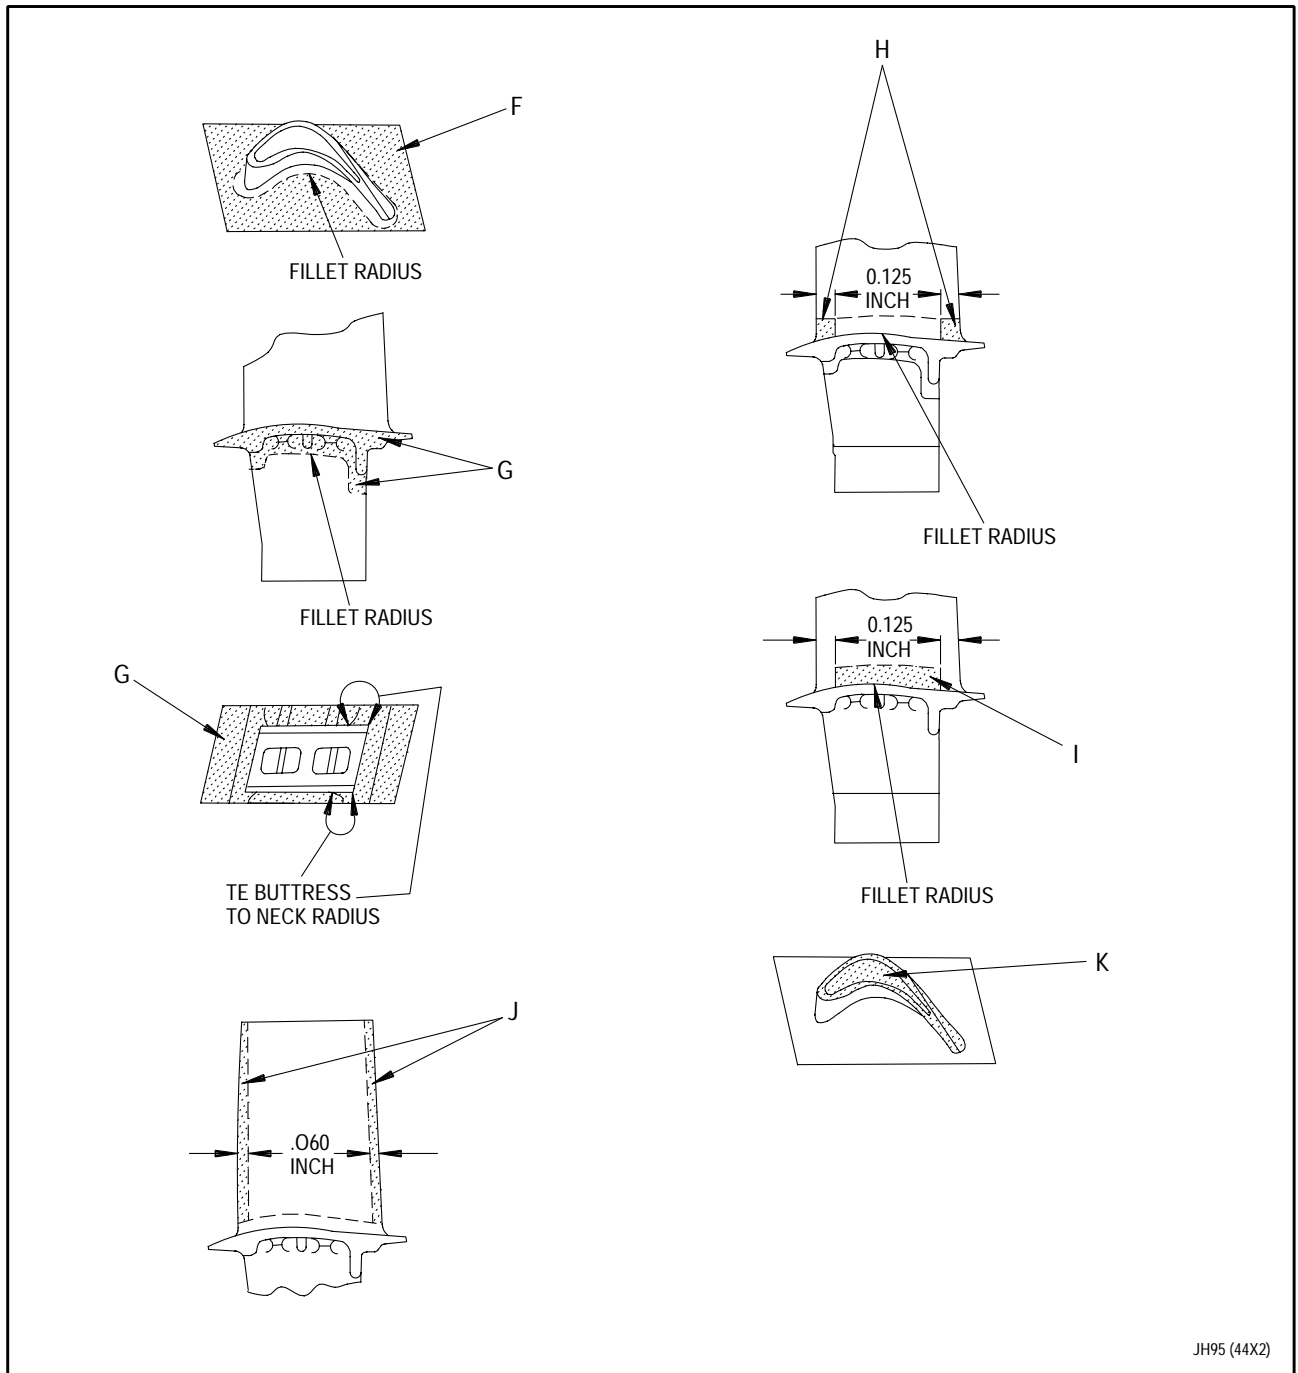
A. First Stage Turbine Rotor Blade Assembly - Crack Inspection
